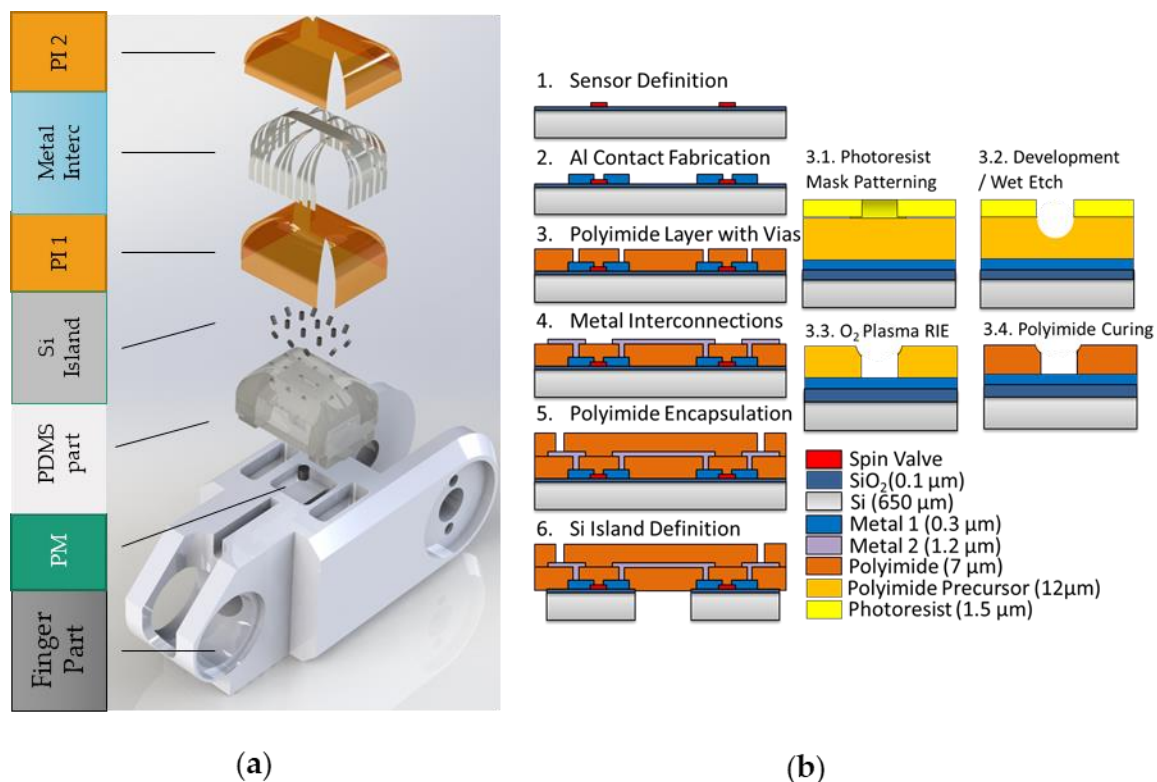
(a) Exploded view of the device identifying each layer and component. (b) fabrication process overview of the flexible hybrid devices, detailing the polyimide via definition.
